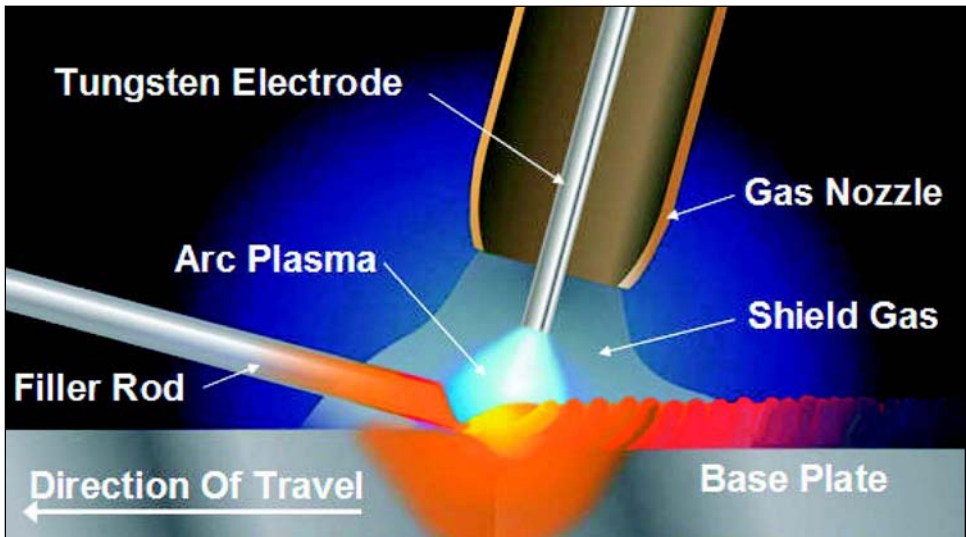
GTAW Welding Arc and Surrounding Components
